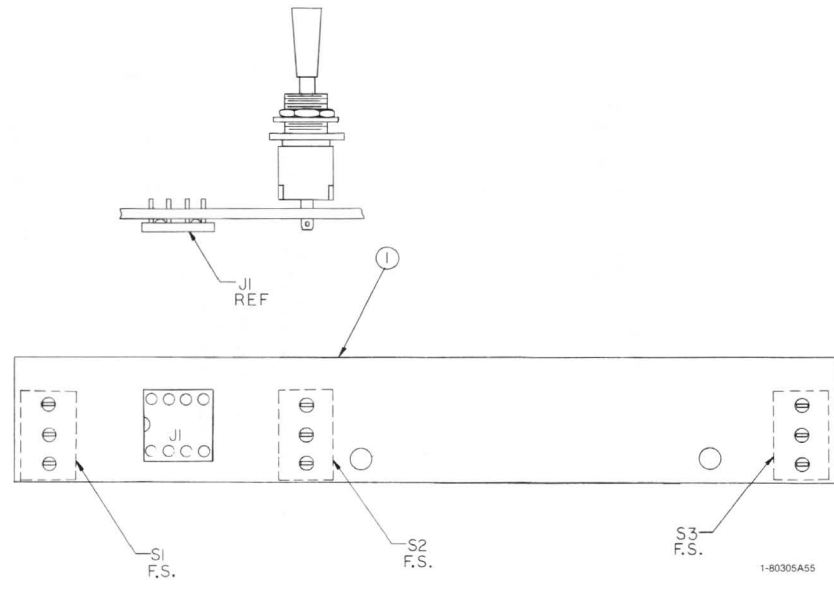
Front Panel A14 (01-80305A64) Parts
